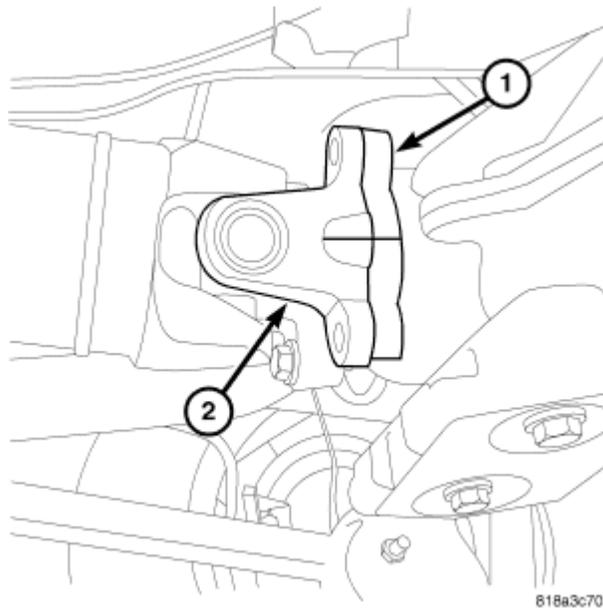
Identifying Axle Flange & Propeller Shaft Flange
